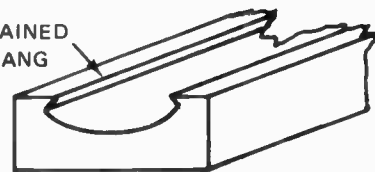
Cross-section of splicing block showing method used to grip tape.
